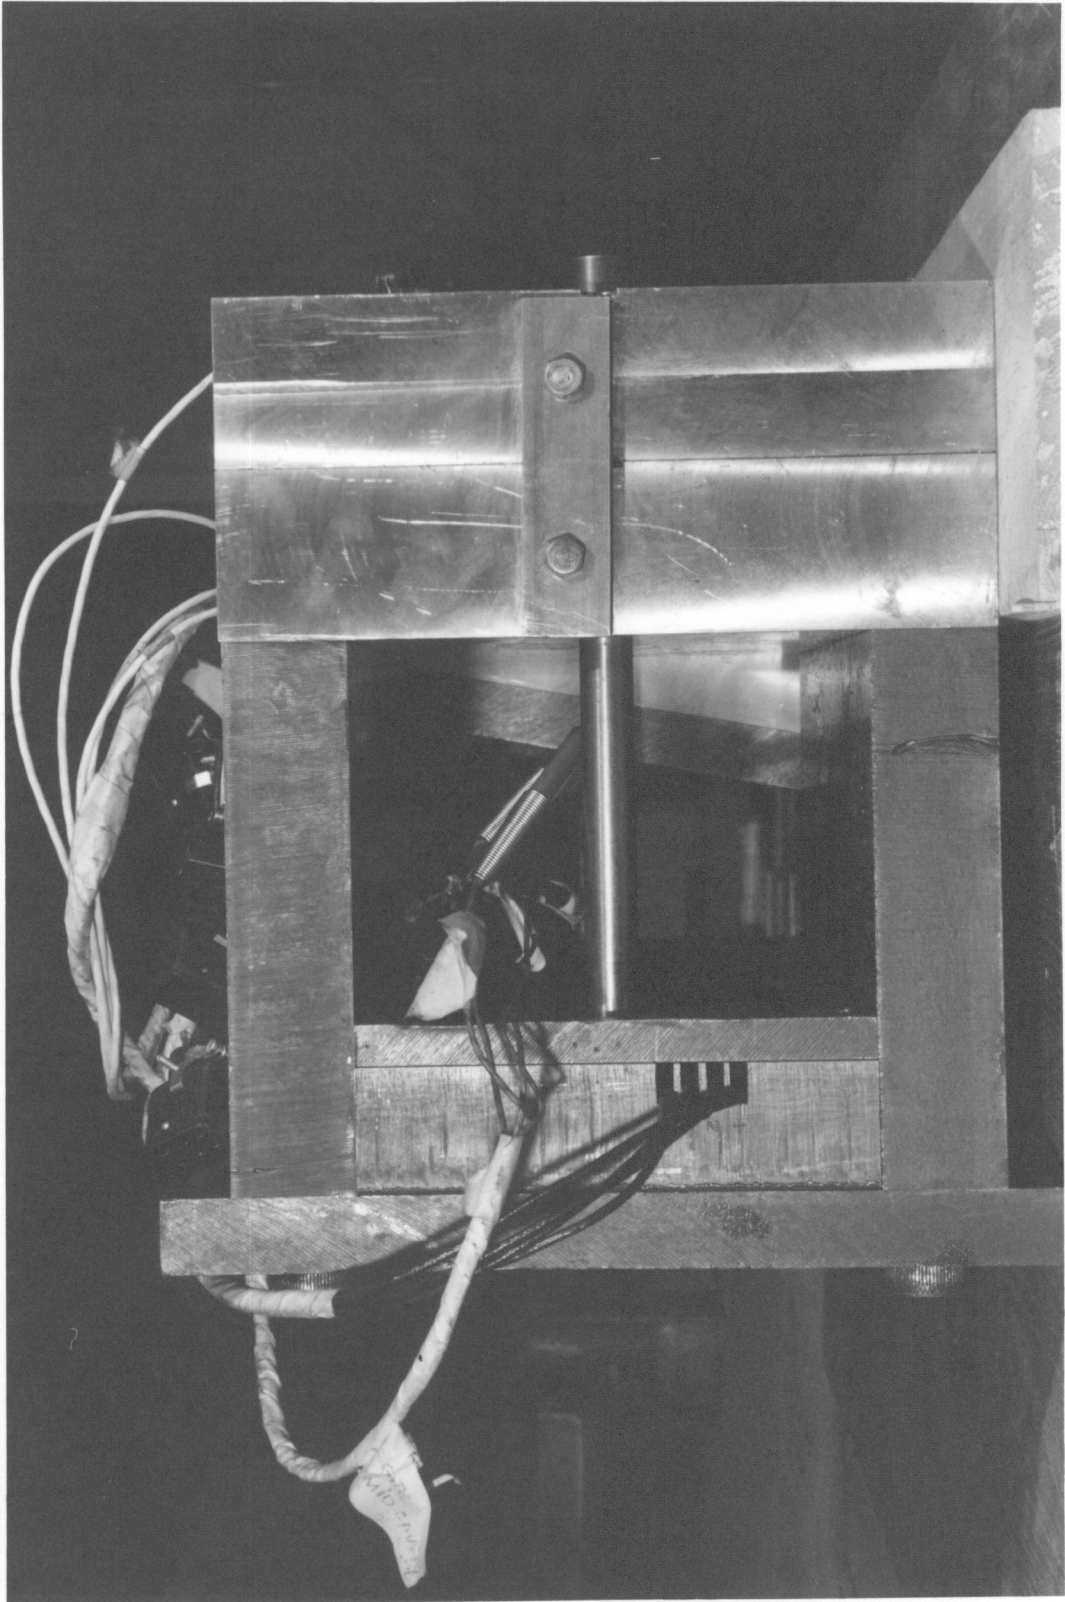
SIDE VIEW OF THE INJECTION MOLD
